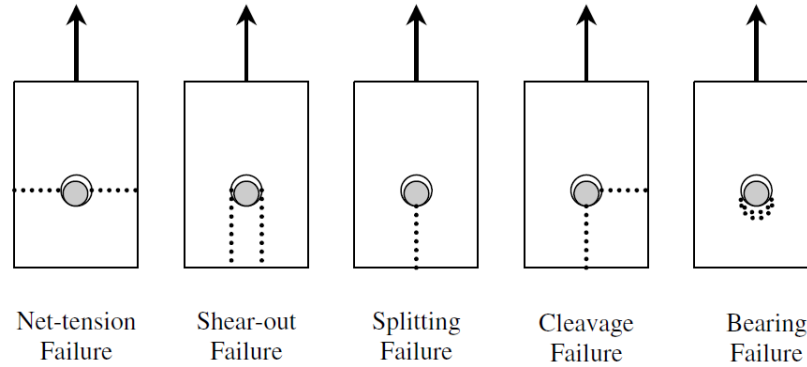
Failure modes of single-bolt lap joint in plane connections
